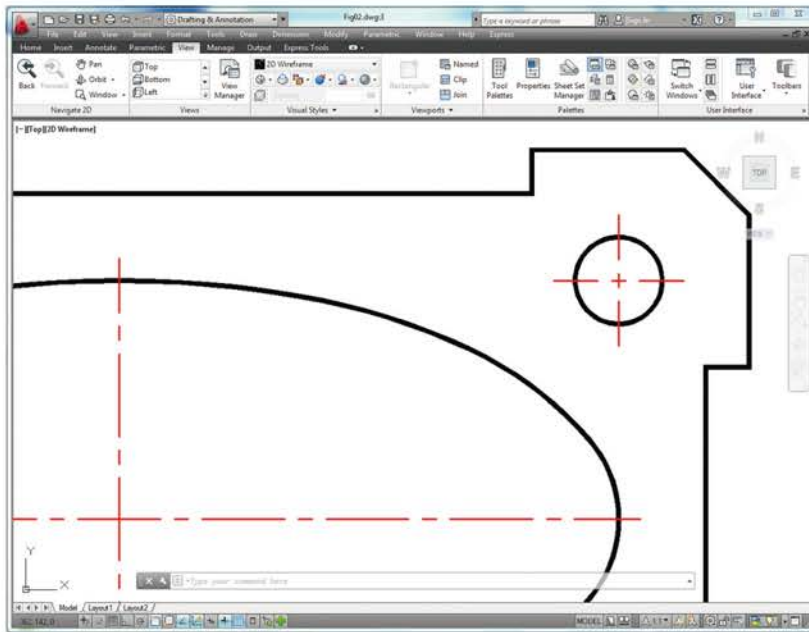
A Zoom Window of part of the drawing Fig. 5.2
